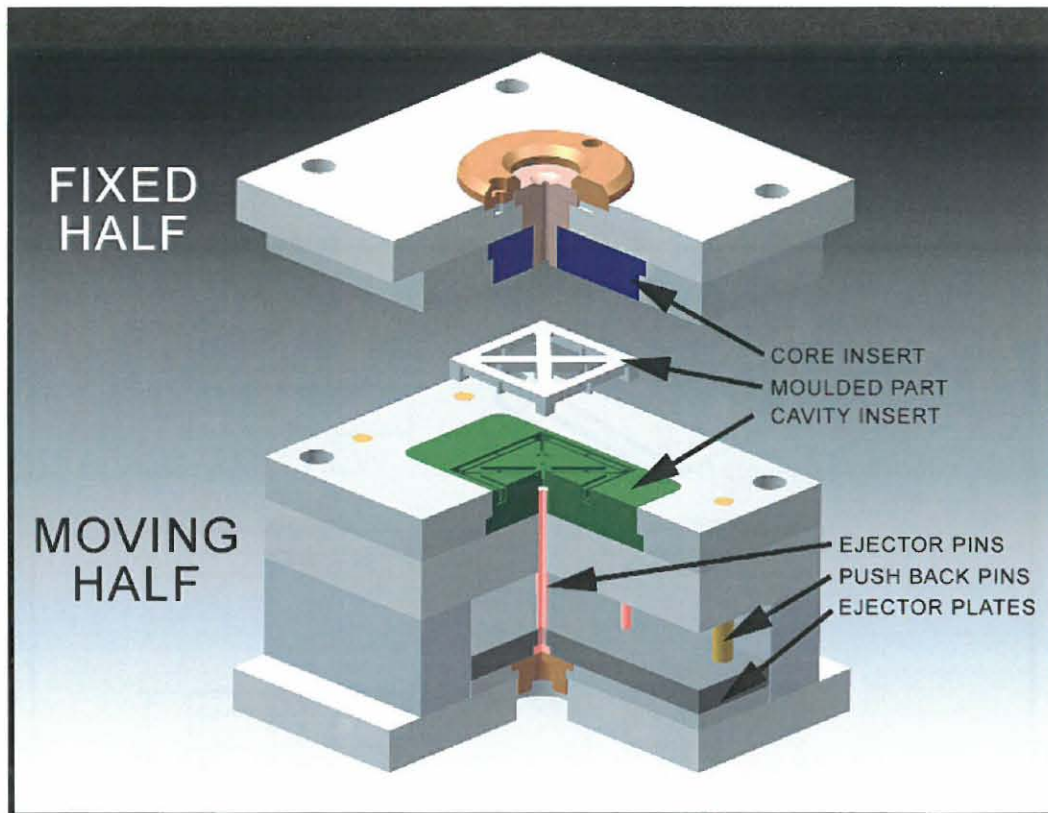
CAD Image of Assembled Tool With Inserts Fitted.
